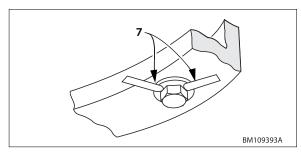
Frame Side Bearing Bolt Feeler Gauge Check
